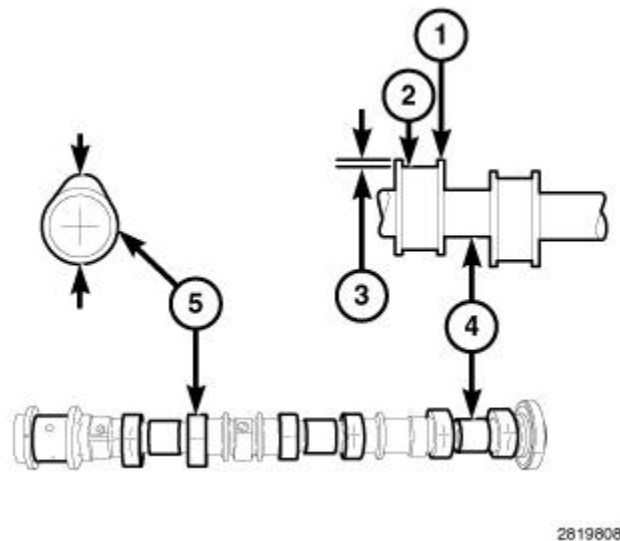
Inspecting Camshaft Bearing Journals & Cam Lobes
